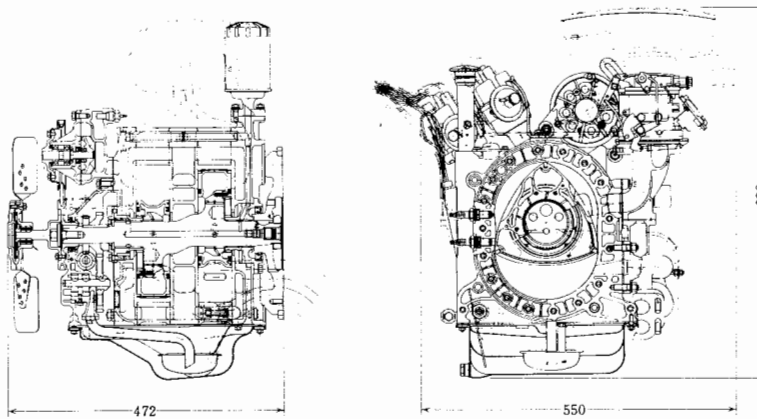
15 Sectional drawing of Toyo Kogyo model 0820 2-rotor engine
